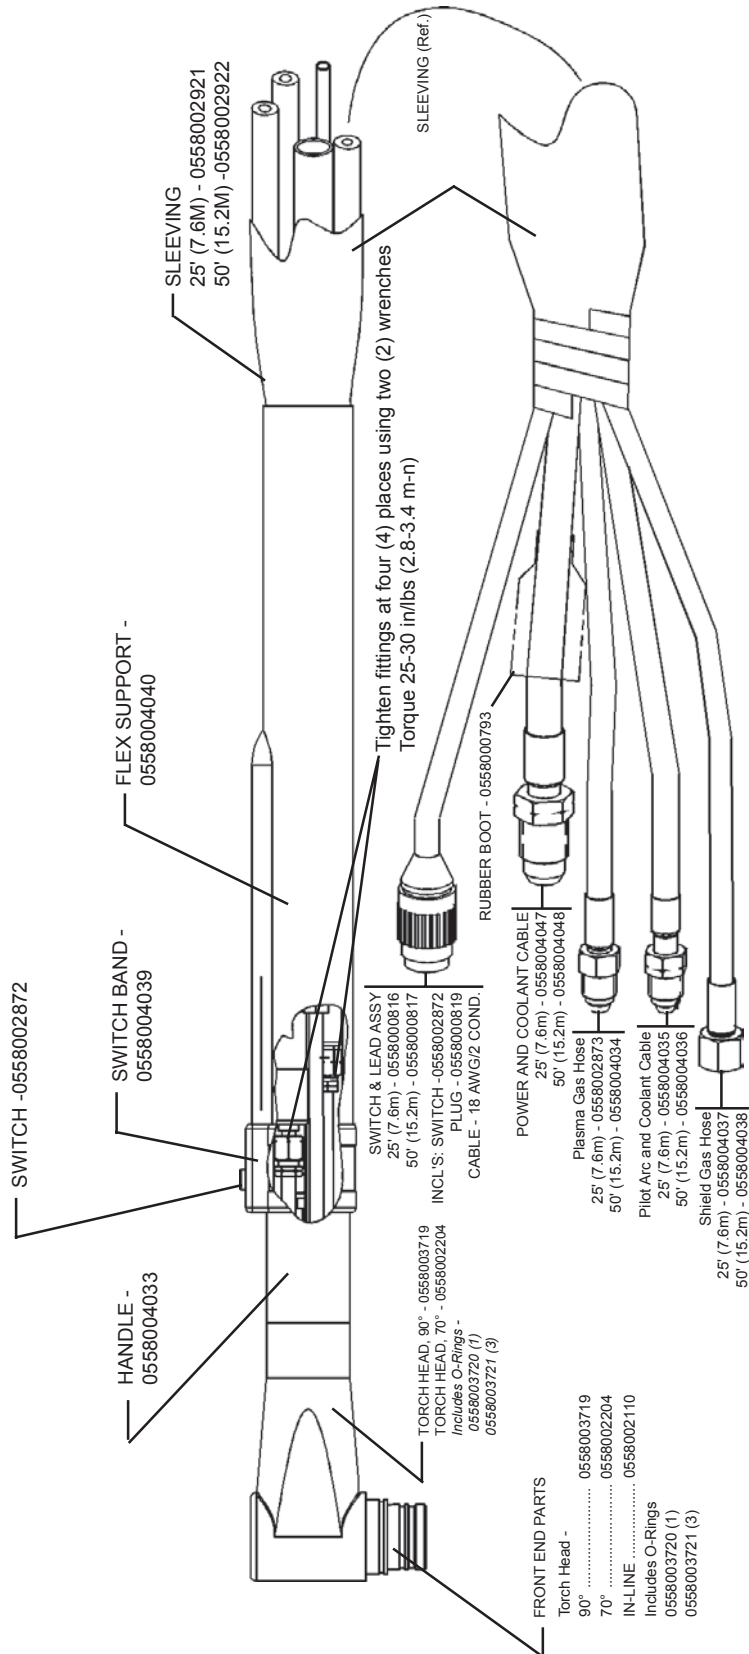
Replacement Parts - PT-26 Torch Assembly
